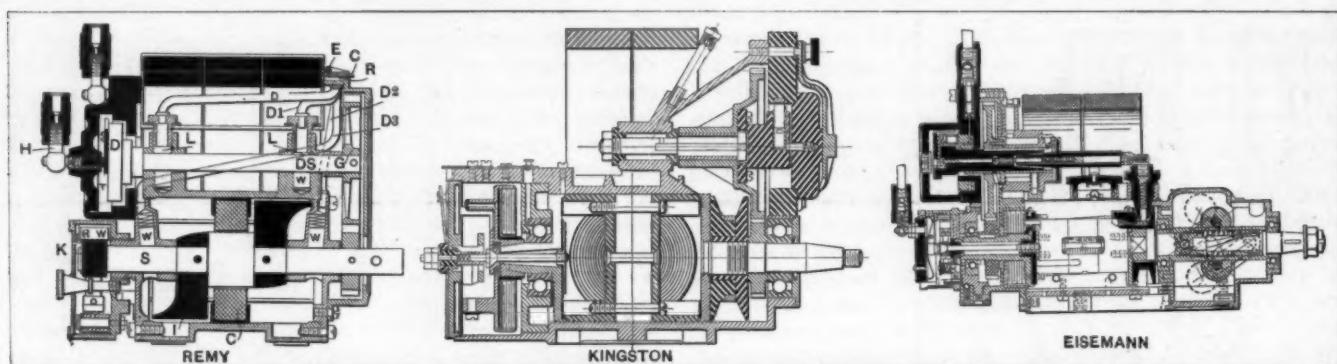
Sections of Remy, Kingston and Eisemann magnetos, showing the relations of the parts and methods of assembling
